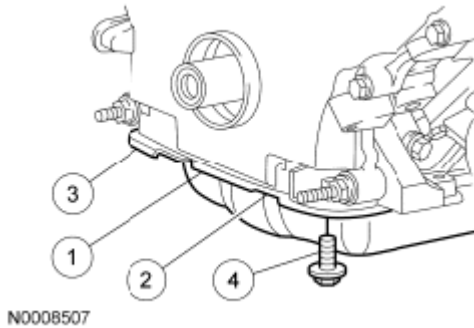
Identifying Tightening Sequence Of Front Oil Pan And Cover Bolts
